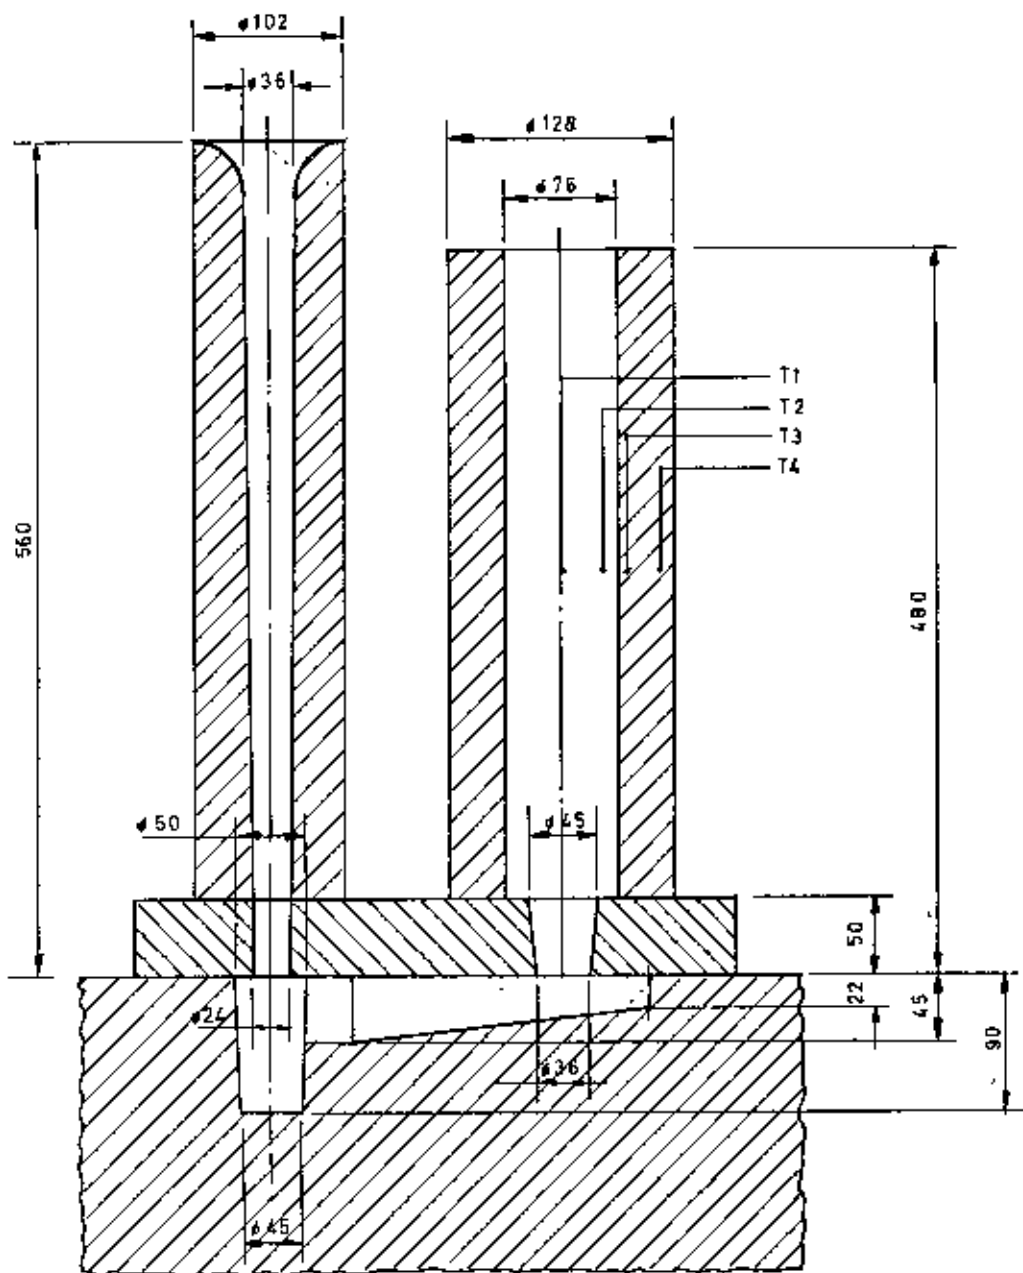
MOULD ASSEMBLY FOR CYLINDRICAL CASTING.
